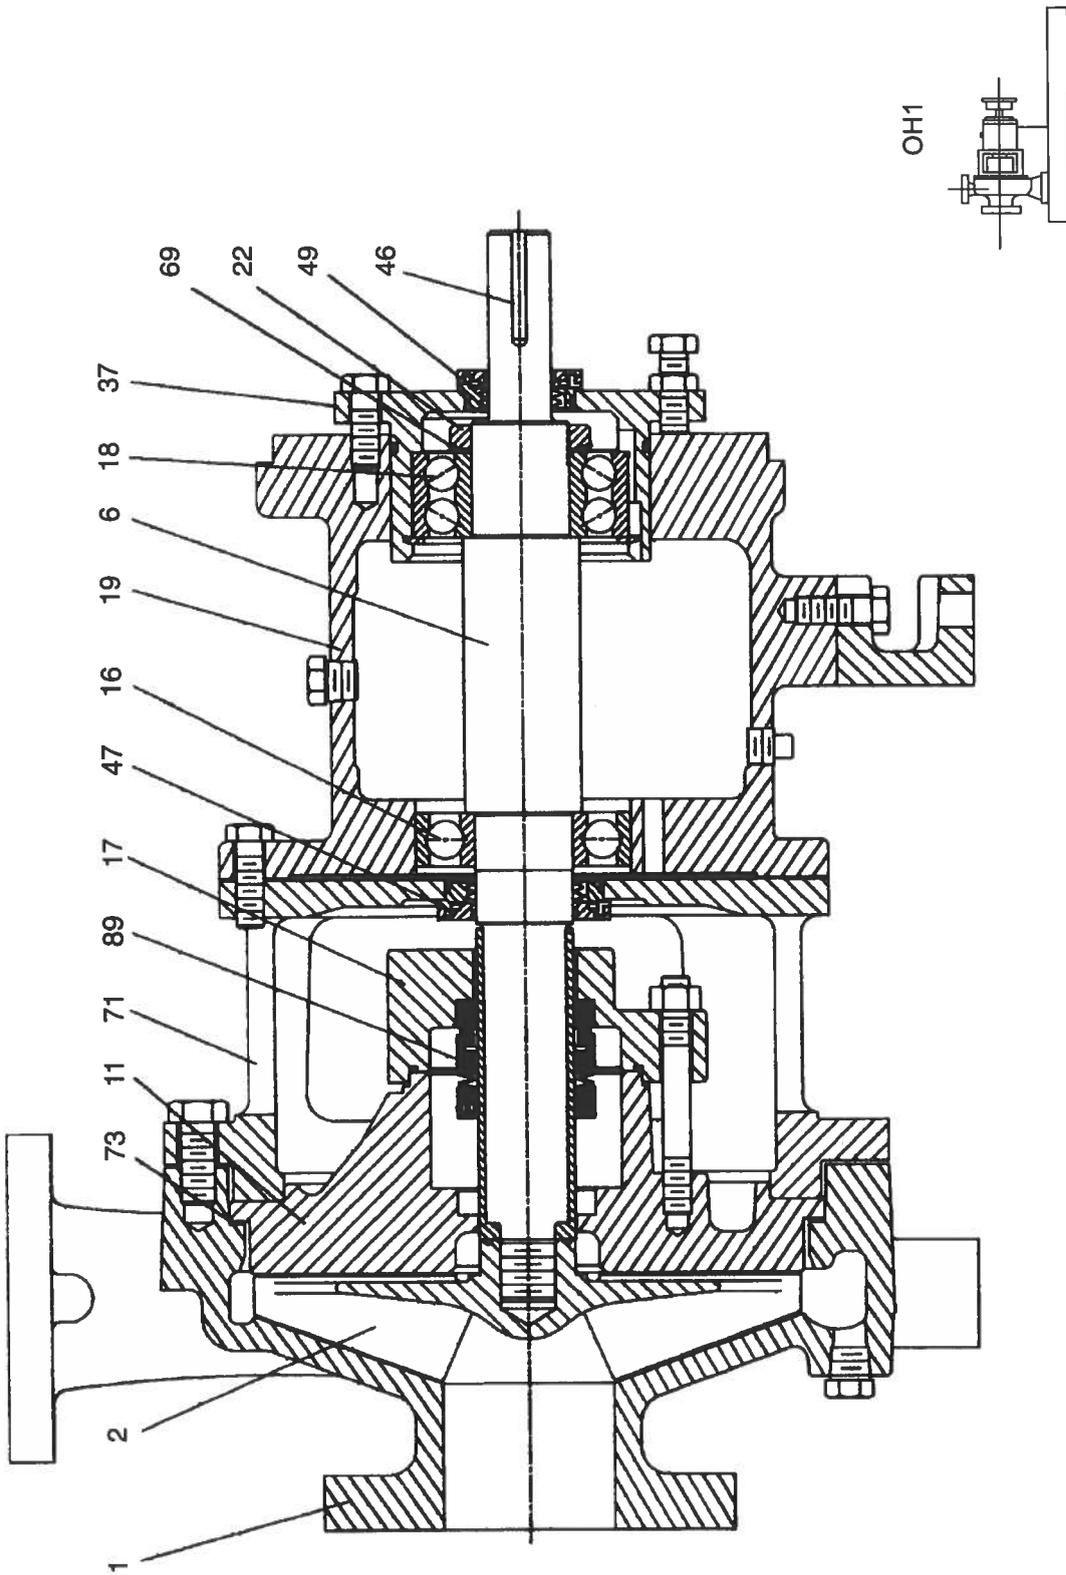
Overhung impeller – flexibly coupled – single stage – foot mounted – ASME B73.1
